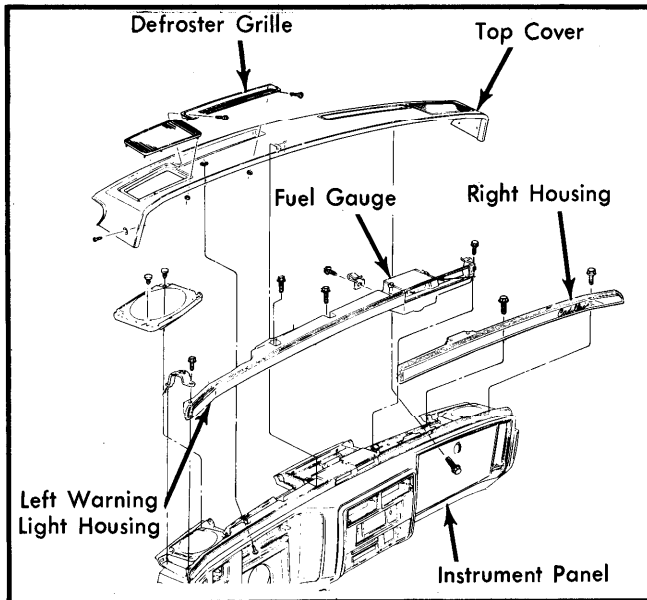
Cadillac Instrument Panel Top Cover (Fleetwood and DeVille)
